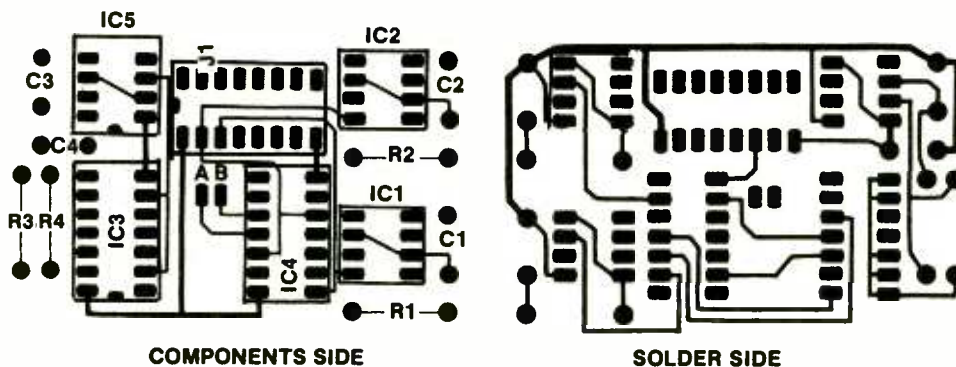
This diagram locates the components that are mounted on the printed circuit board.
